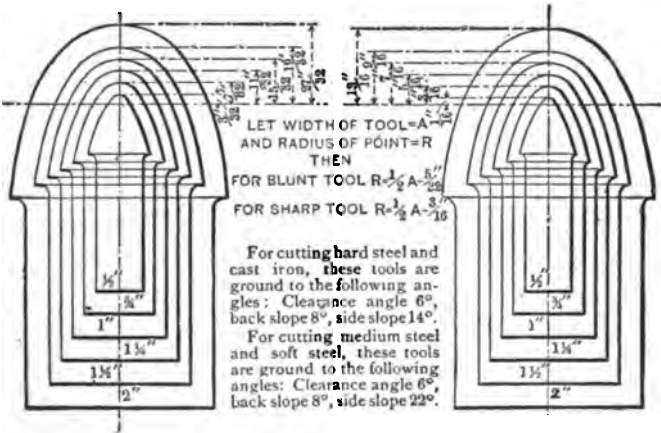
Outline of cutting edge, Taylor standard round-nose tool.
